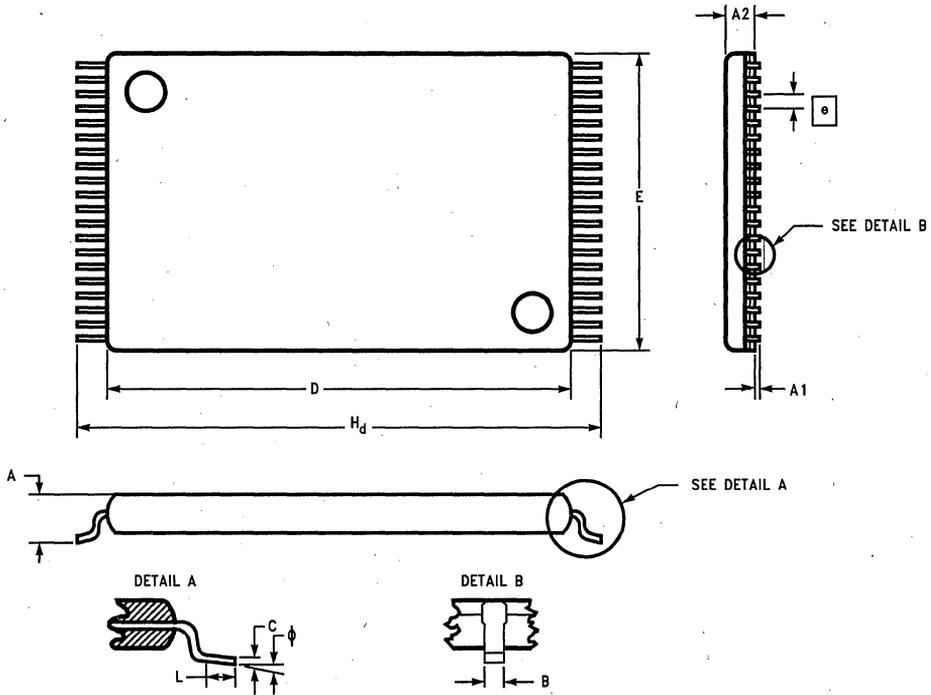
32-Lead TSOP Package Drawing and Specifications
